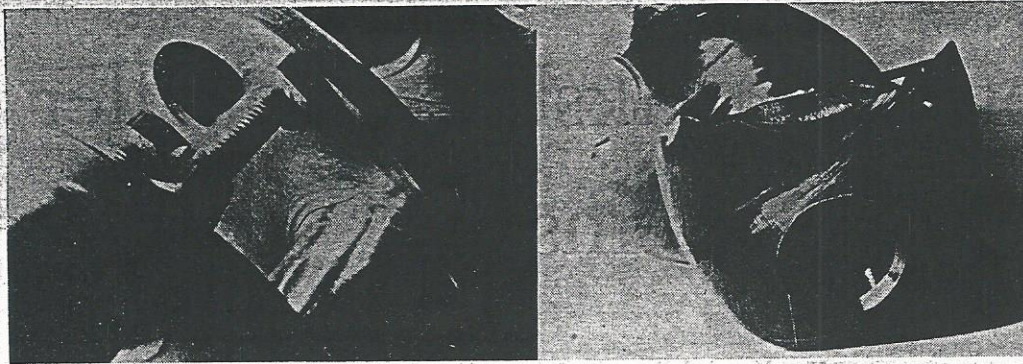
Fracture of an Aircraft-Engine Crankshaft Due to Longitudinal Vibration - (Left) Surface Crack in the Hollow - (Right) Surface of the Fracture
